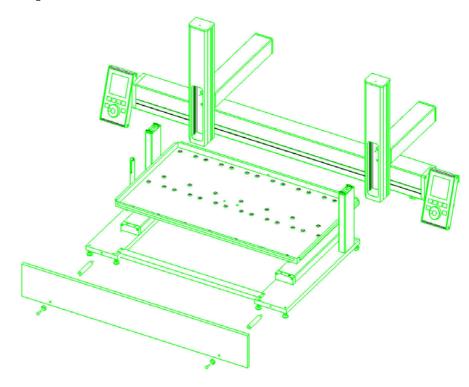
IFC PAL Assembling Tray Pan and X-/Y-Axis
